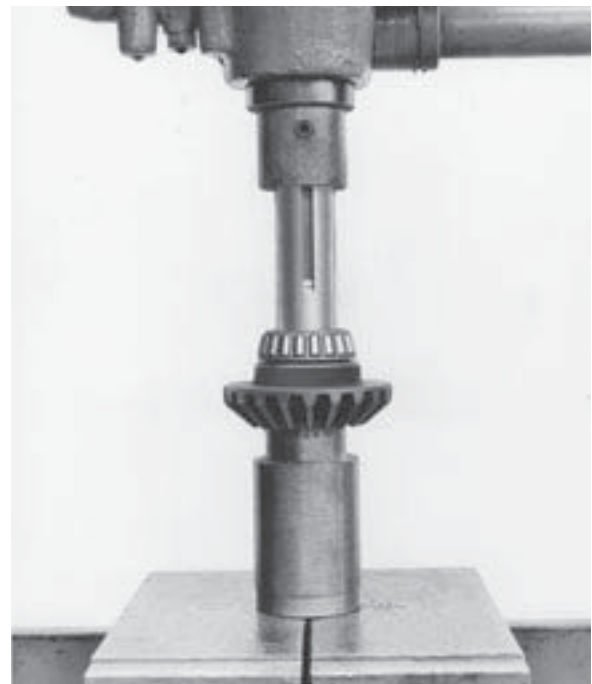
Pressing Shaft out of Bearing and Gear
